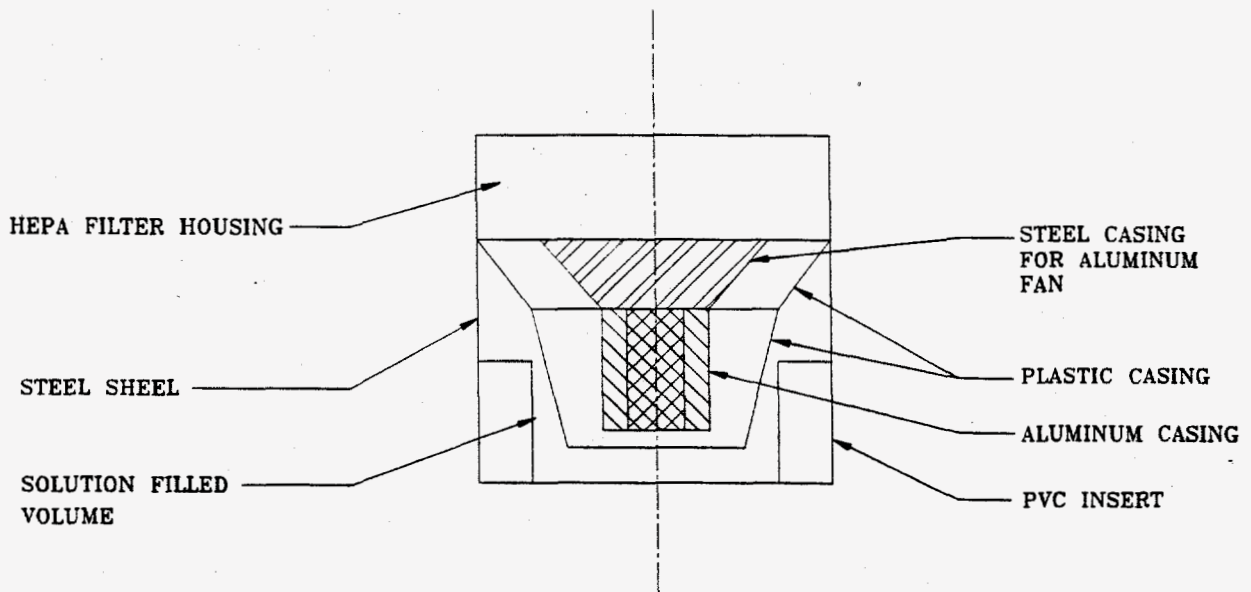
Schematic of actual motor assembly approximate dimensions.
